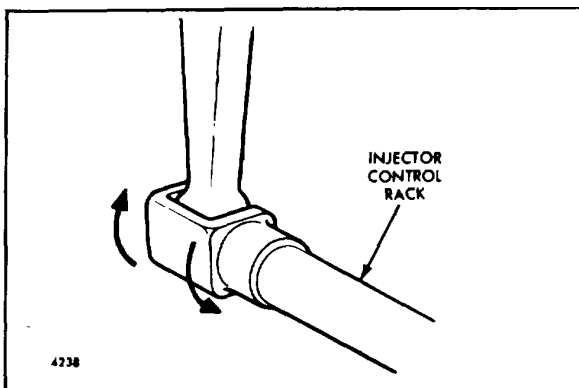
Checking Rotating Movement of Injector Control Rack
